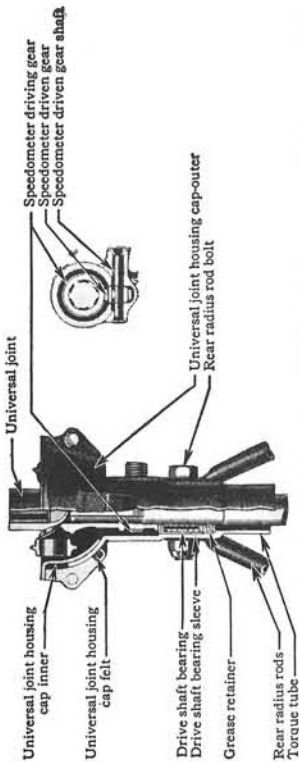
Drive system showing the universal joint which connects with the transmission main drive shaft (see also transmission illustration and top view of chassis illustration), drive shaft bearing and sleeve, grease retainer, rear radius rods and bolt, torque tube and drive shaft which extends to rear axle but shown cut here. The speedometer drive is also shown.
